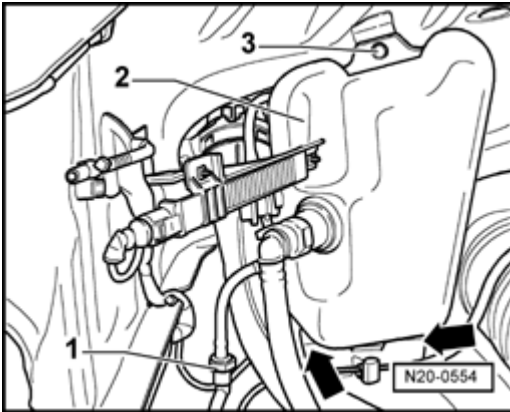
Identifying Ventilation Line, Mounting Bolt & Expansion Tank
